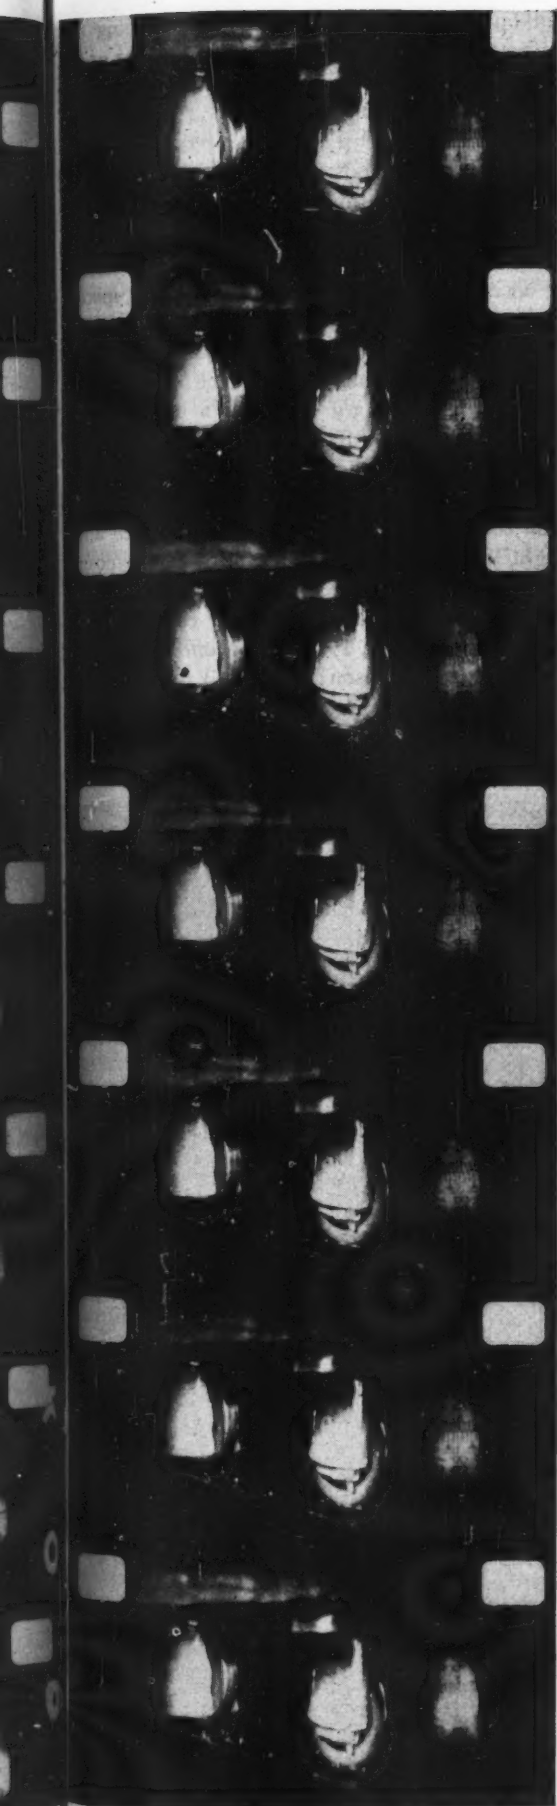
Action of valve tappet rollers and cam motion assisted in the analysis of valve operation. Camera could see through oil haze
